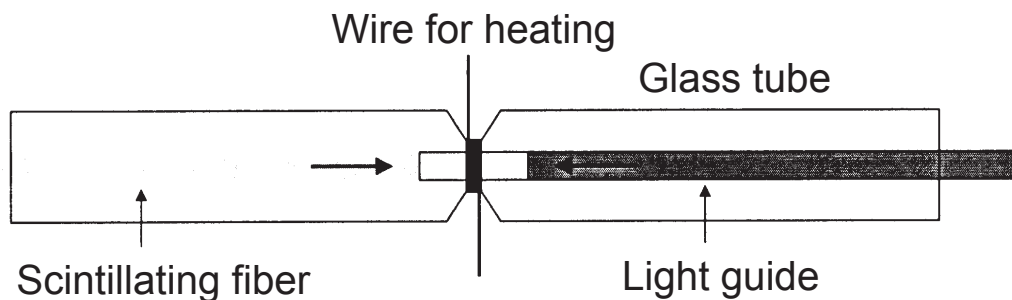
Welding of the scintillating fiber to the light guide
